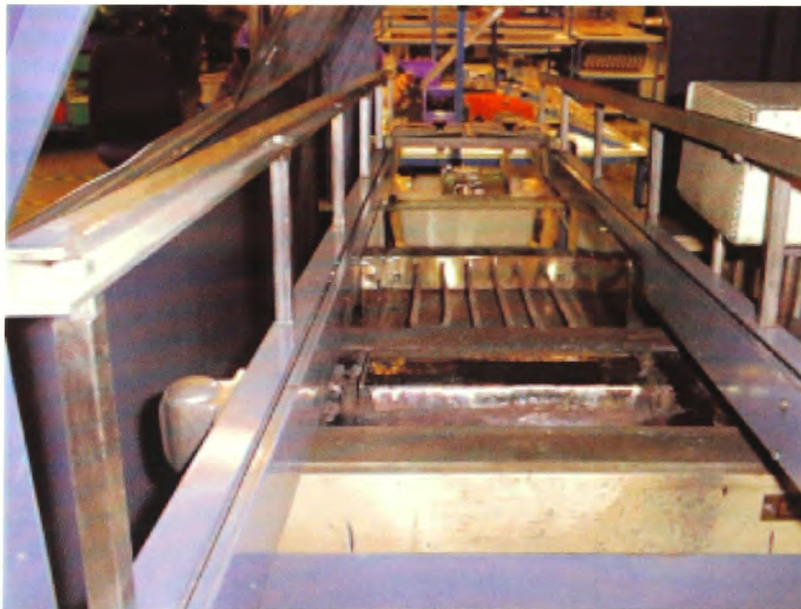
Wave Soldering Machine (Courtesy of Alps Electric)
